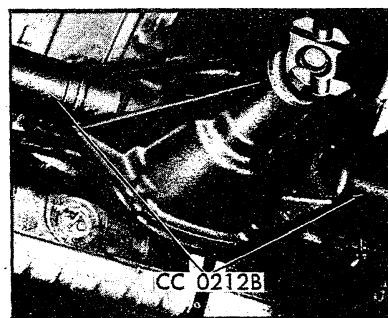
Rear Axle Unit Number Located on Right or Left Axle Tube Adjacent to Carrier
